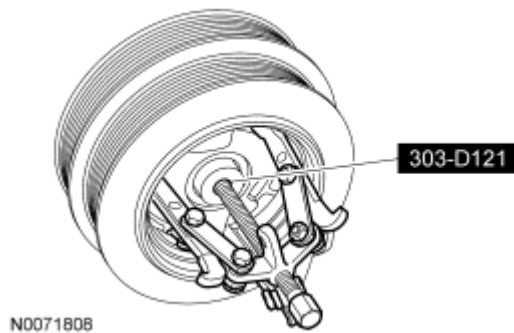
Removing Crankshaft Pulley Using 3-Jaw Puller
